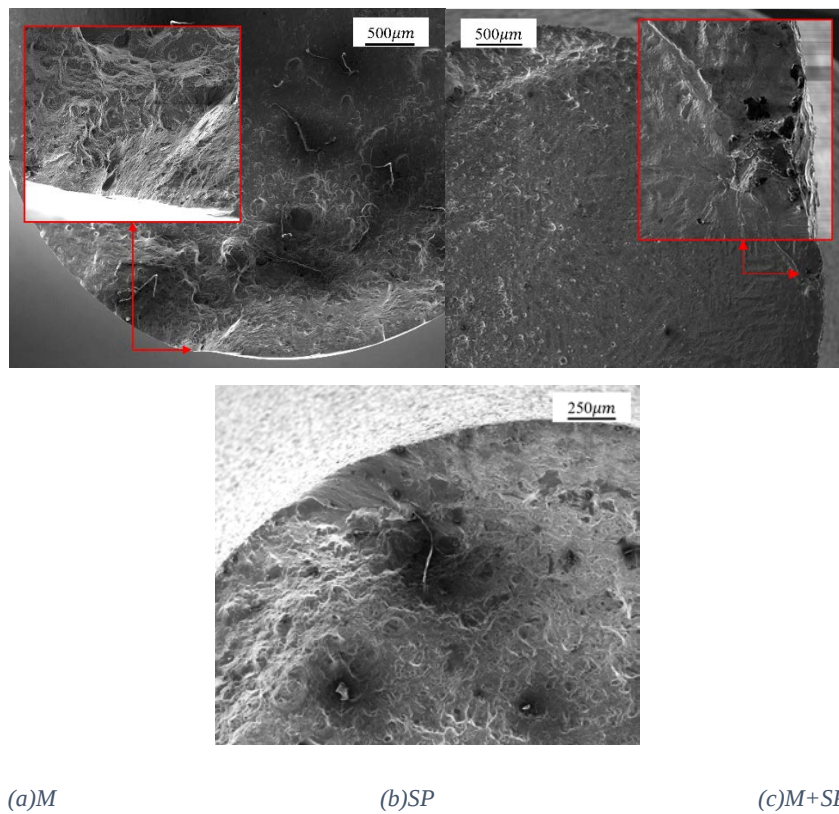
SEM fracture surfaces images of fatigue samples in different conditions Machined (M), Shot Peening (SP) and Machined + Shot peening (M+SP).
